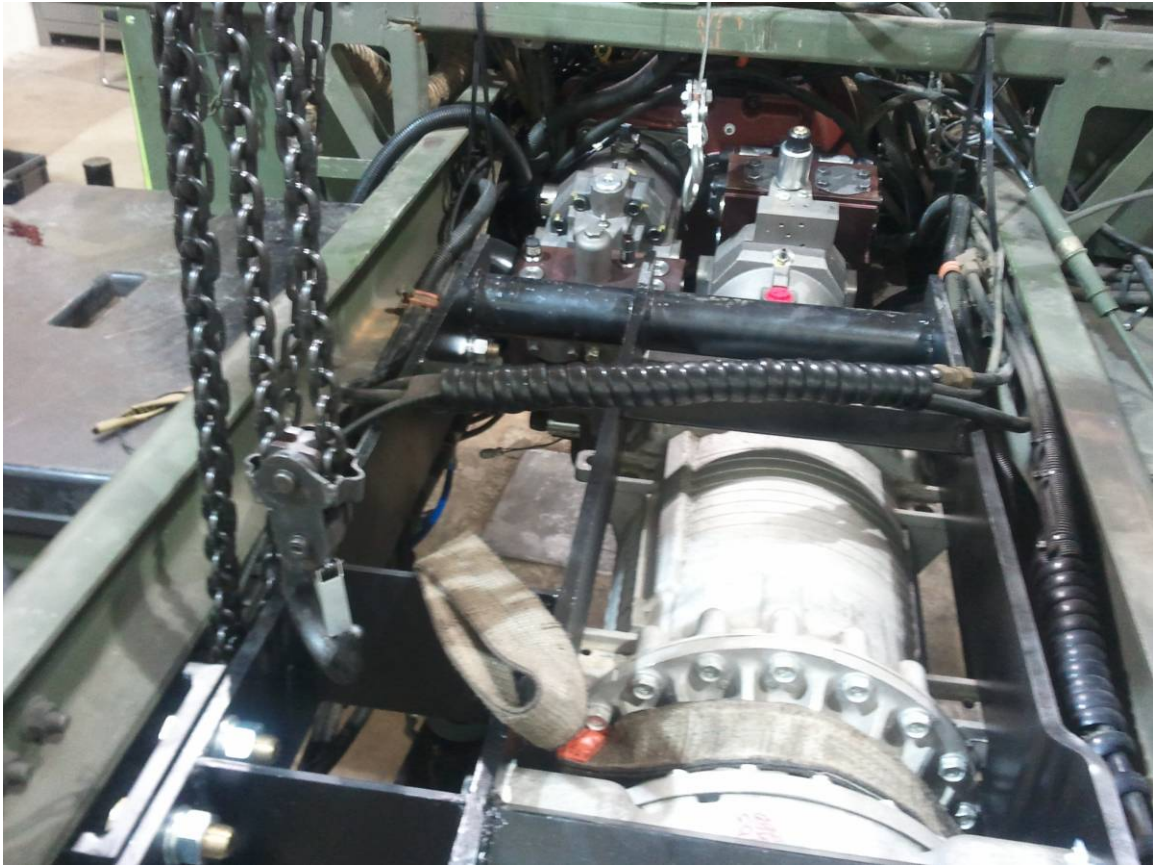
Transmission and Motor Assembly Installation
